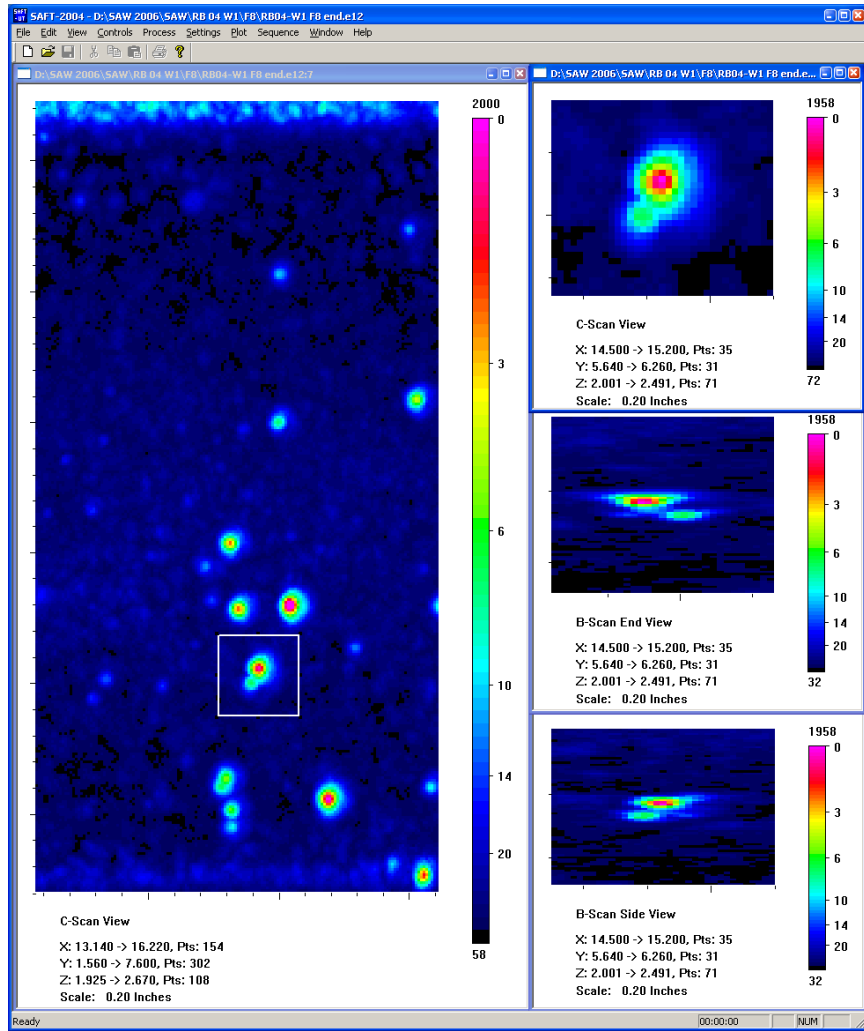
F8 Immersion Testing Images of Small Fabrication Flaw: *RB04-5.5
